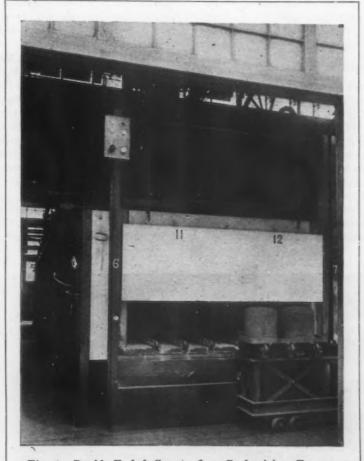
Double-Ended Counterflow Carburizing Furnace. Two pot loads of ring gears on a single tray about to be charged into furnace
